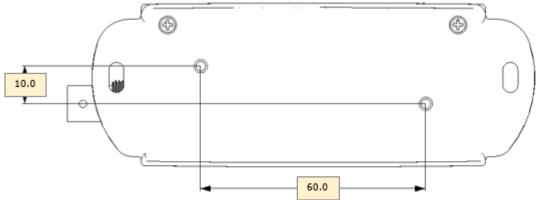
Modbus EC Sensor Adapter Dimension - Bottom View
